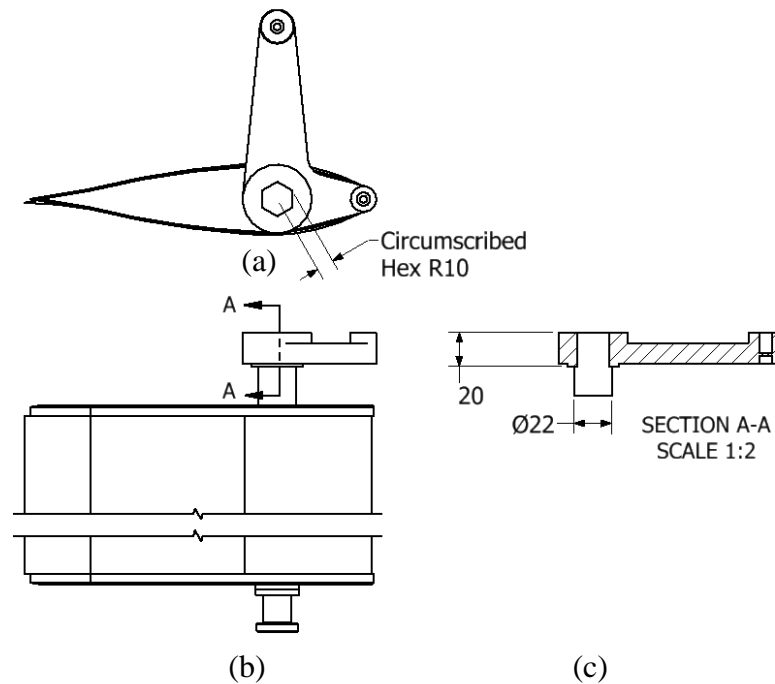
Proposed new cam arm to blade shaft connection with (a) Plan view, (b) partial side elevation and (c) sectional view through planes A-A.
